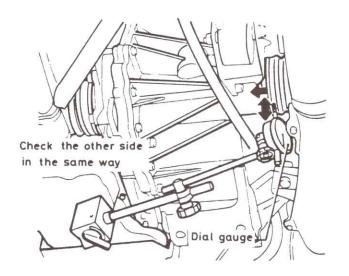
Using a dial gauge to check the differential side gear wear (Sec 10)
